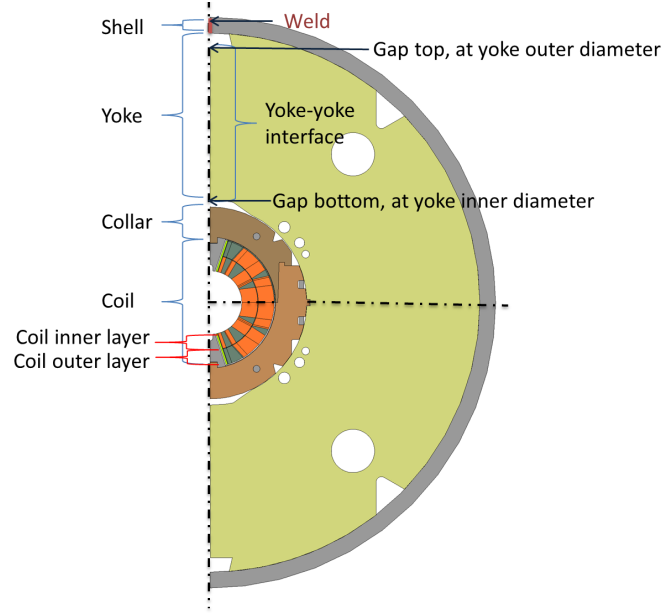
An intersection of the single-aperture dipole magnet. The location of the shell weld seam can be seen on the symmetry line. The coil is divided into into inner and outer layers. [26]
